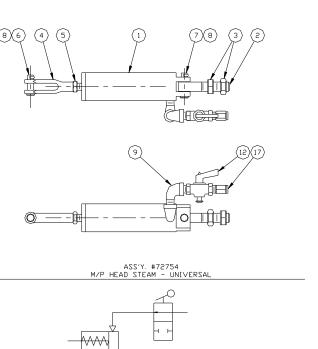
72590 (Rev. C) Head Steam Actuator
